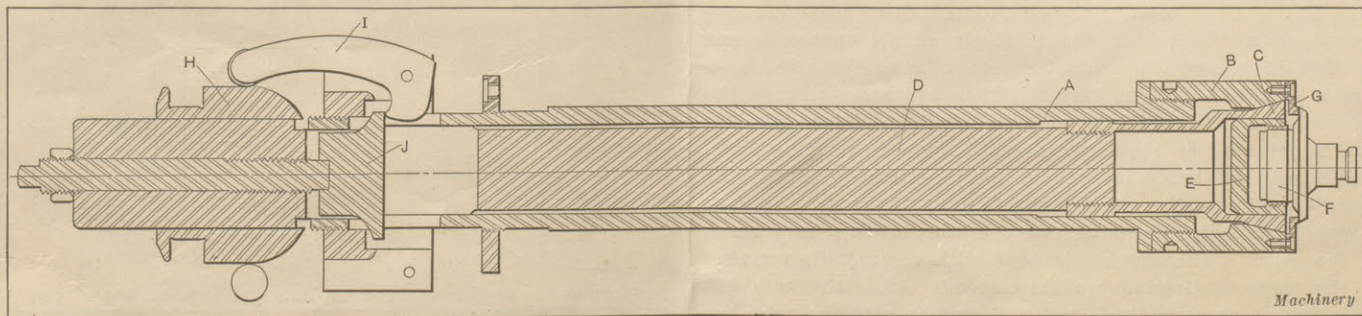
Section through a "Gridley" 3/4-inch Automatic Turret Lathe Spindle showing Method of chucking Shrapnel Fuse Body
